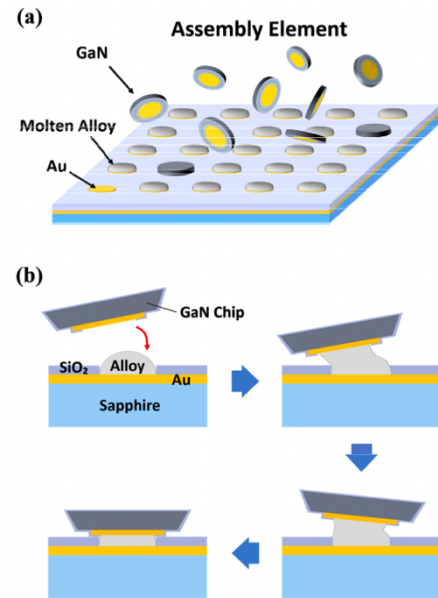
The schematic diagram of (a) assembly elements, and (b) molten solder capillary force-driven self-assembly Micro-LED mass transfer[24].
